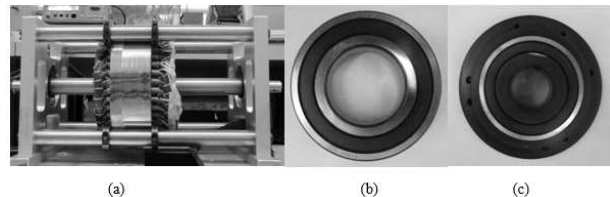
An SPSM with a. modified enclosure b. bearing and modified 60% SE bushing. c. bearing and modified 60% DE bushings
